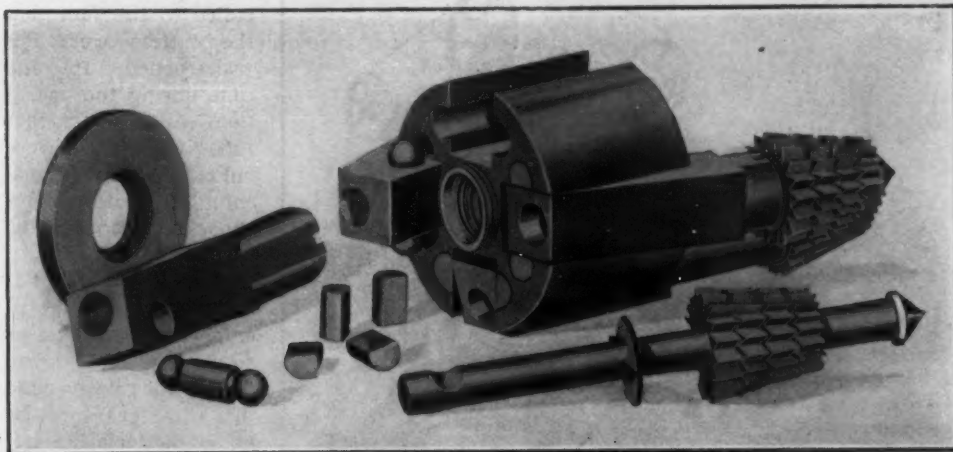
View of the Norivet Cleaner Head, Manufactured by the Liberty Mfg. Company, Pittsburgh, Pa., Showing Separate Parts.
